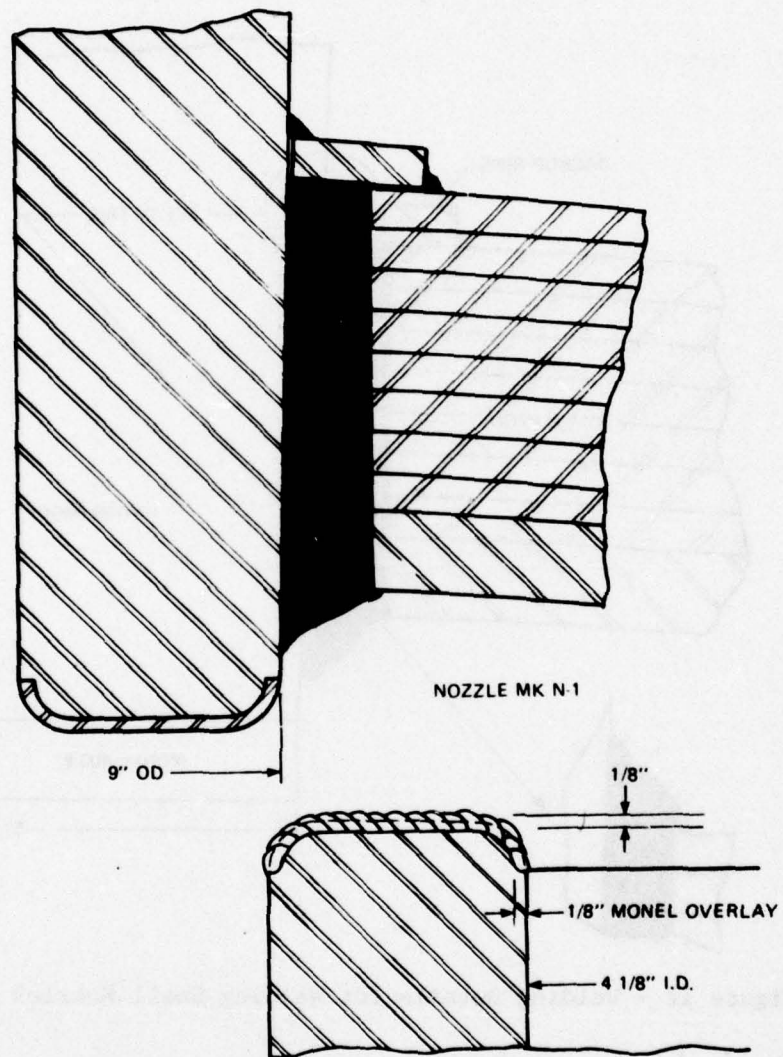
Welding Details for Feed Through Nozzle
